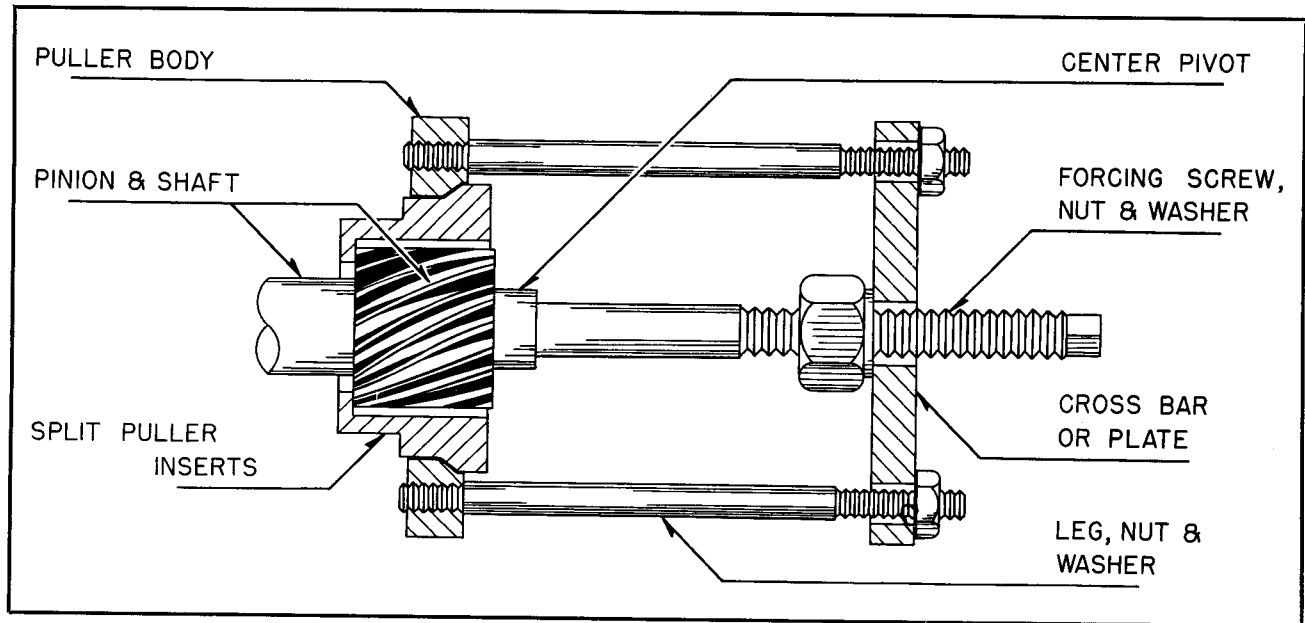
Special Puller for Removing Motor Pinions of Small Diameters.
